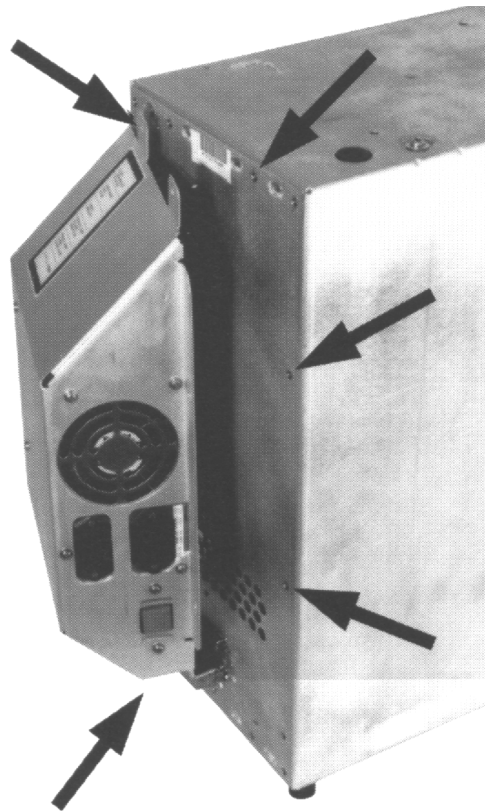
Preparing the Leadscrew Assembly for Replacement
